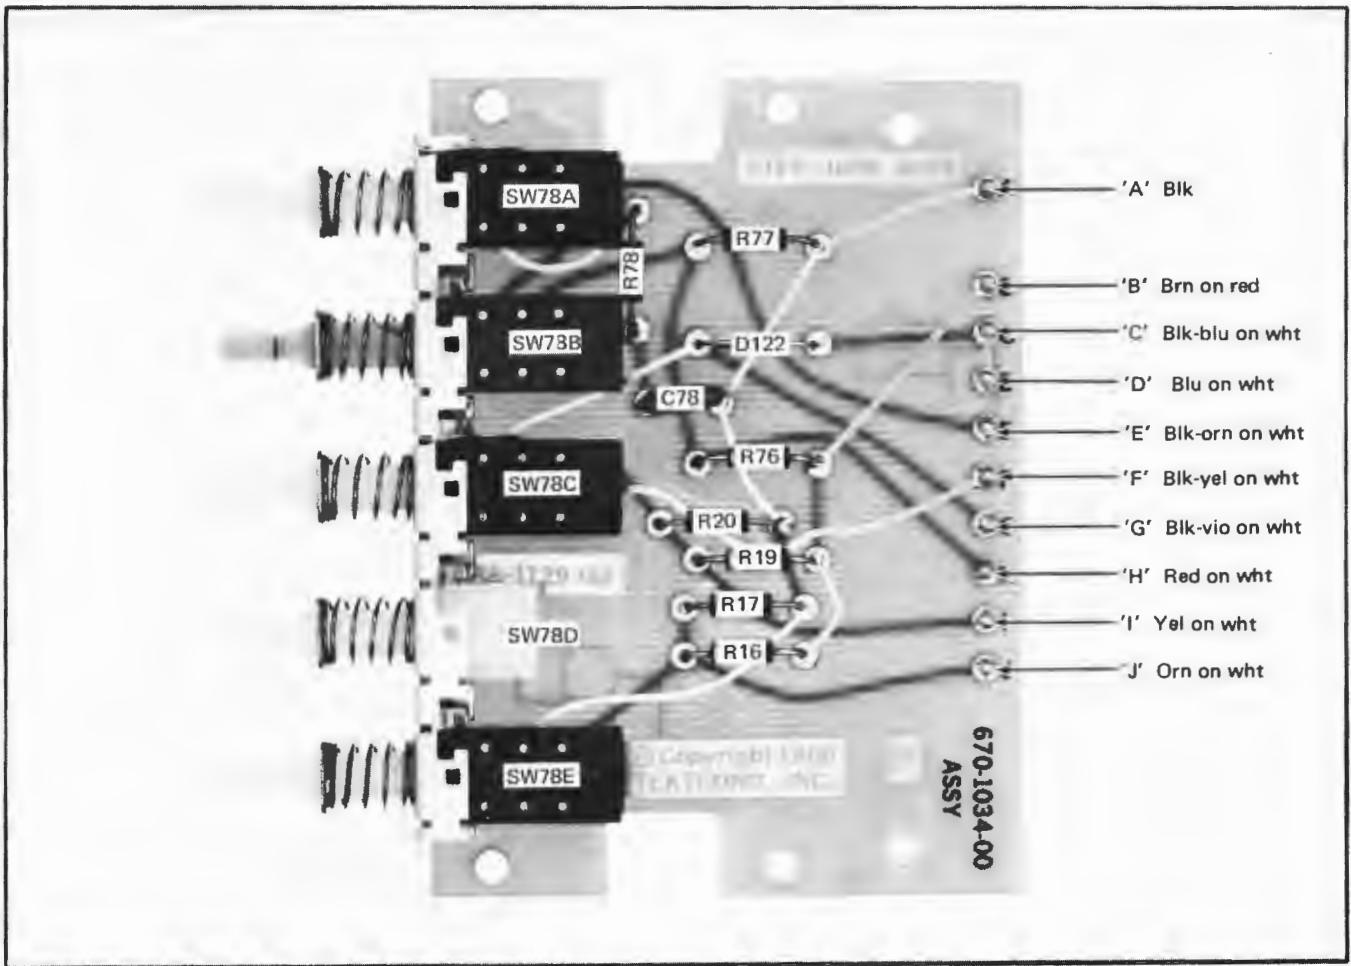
Component locations and wiring color codes on Step Gen Rate circuit board.
